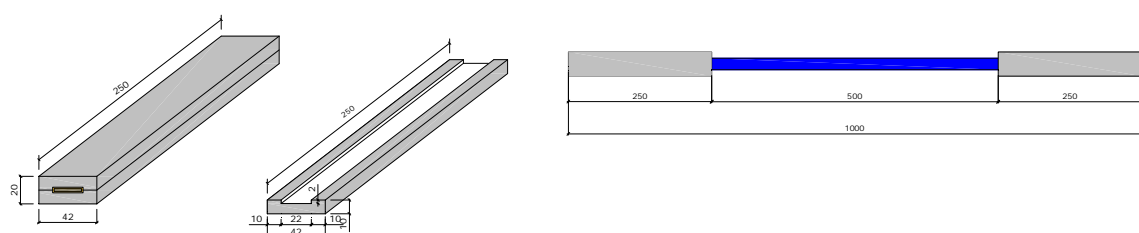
Design of anchorage at the end of FRP specimens to avoid splitting of FRP
